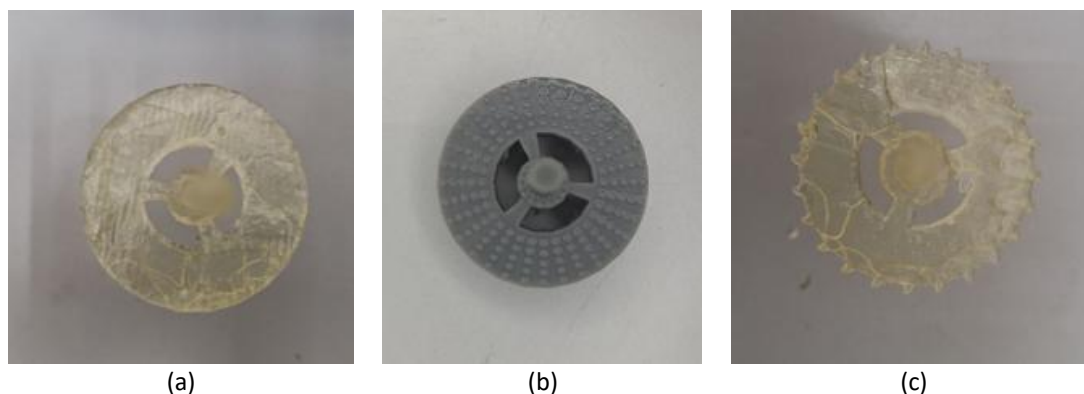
Fabricated 3D printed model of (a) Pure Tesla Turbine Disc (Model 1) (b) Roughened Surface Disc (Model 2) (c) Bladed Disc (Model 3)
